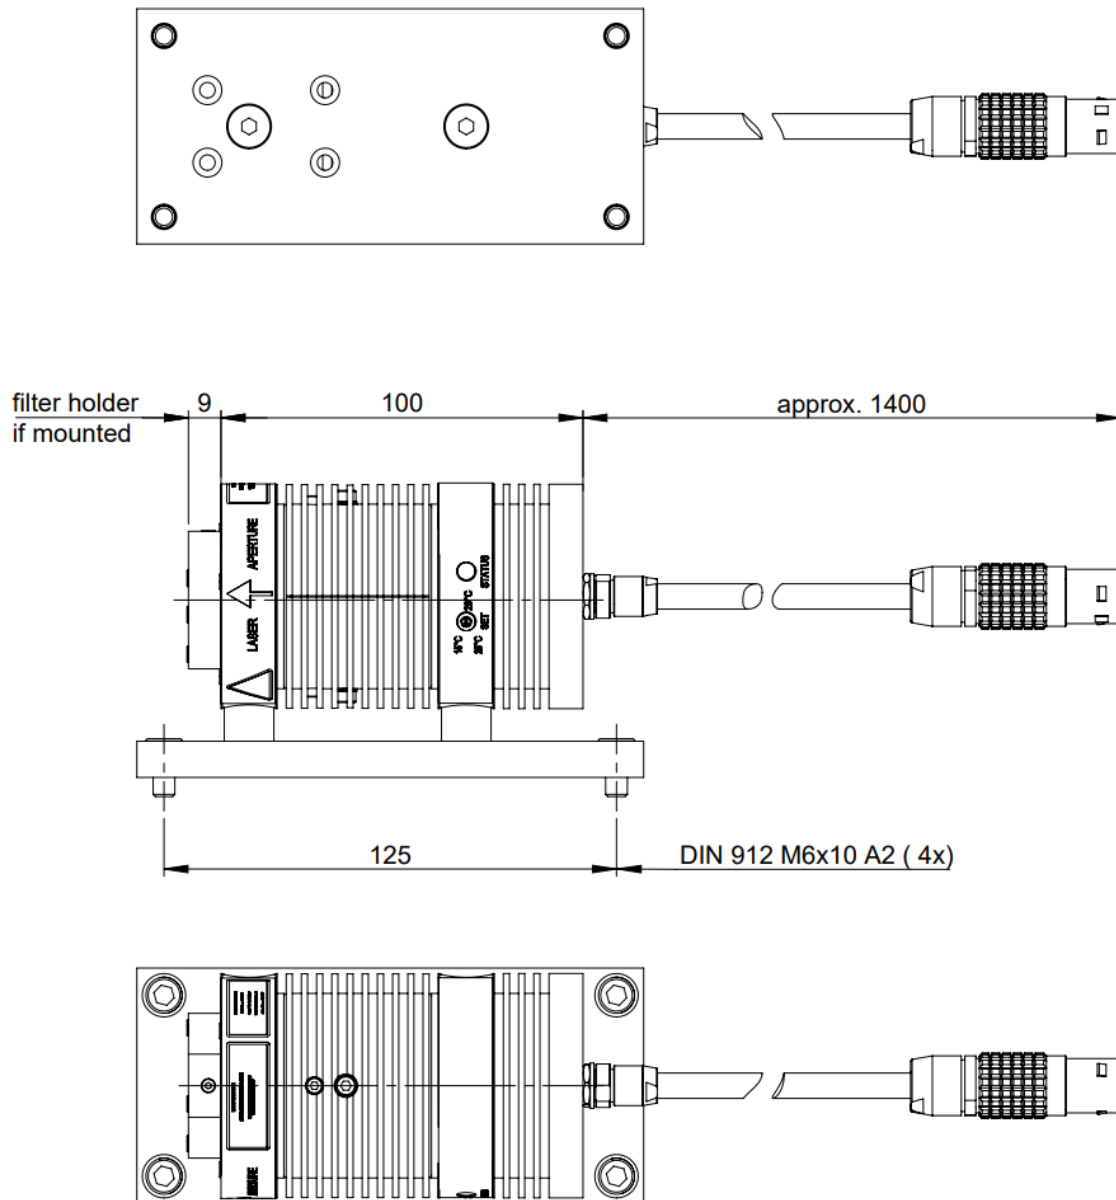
Dimensions of an LDH laser head with mounting plate and filter holder
